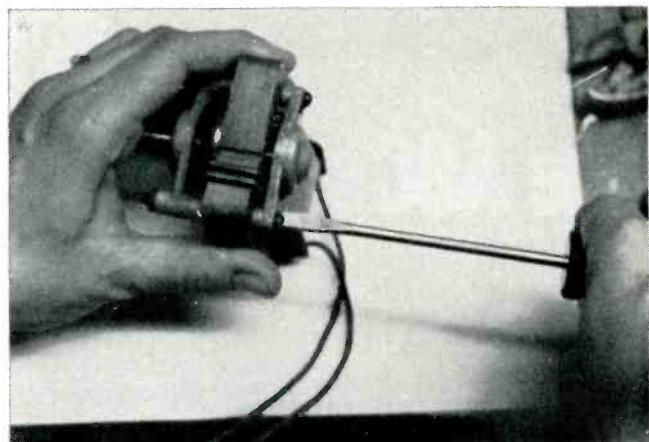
The screws holding the bearing plates can be adjusted for correct alignment.
